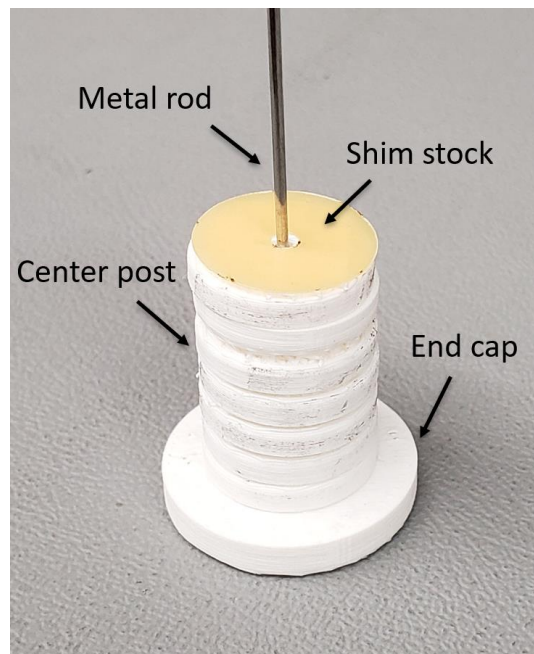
Center post pieces made out of plastic being assembled. A metal rod helps in alignment. Laser cut pieces of shim stock used to provide an air gap.
